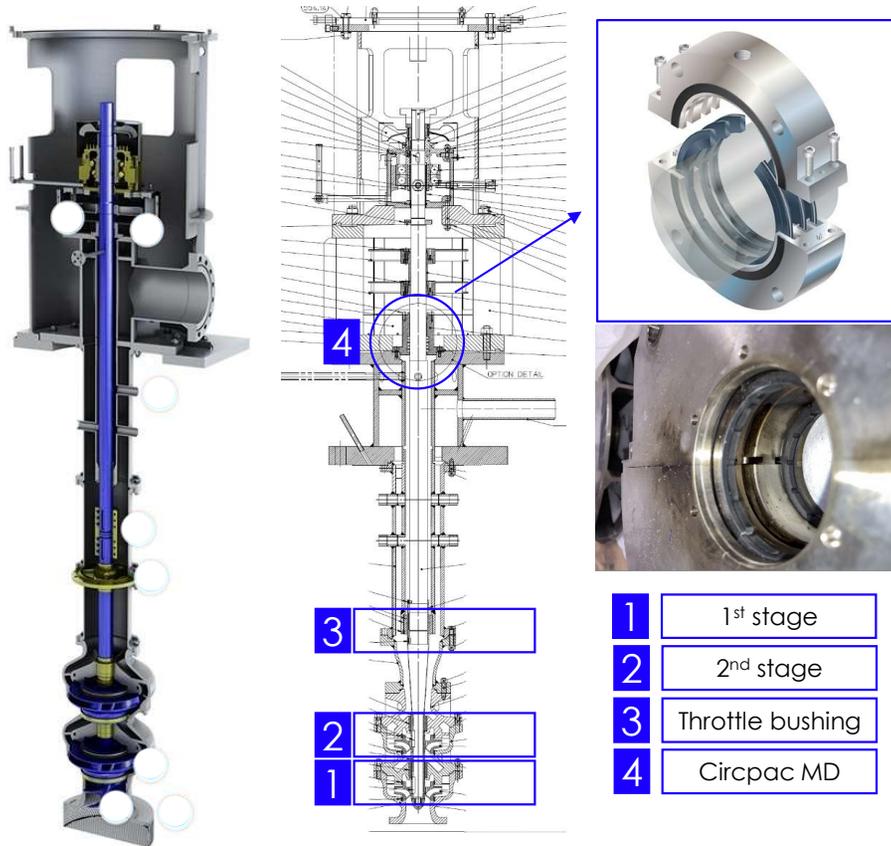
(Left) Sulzer VEY Pump design cross section. (Center) Chloride Validation Sulzer Pump cross section. (Right) Circpac MD Seal.
